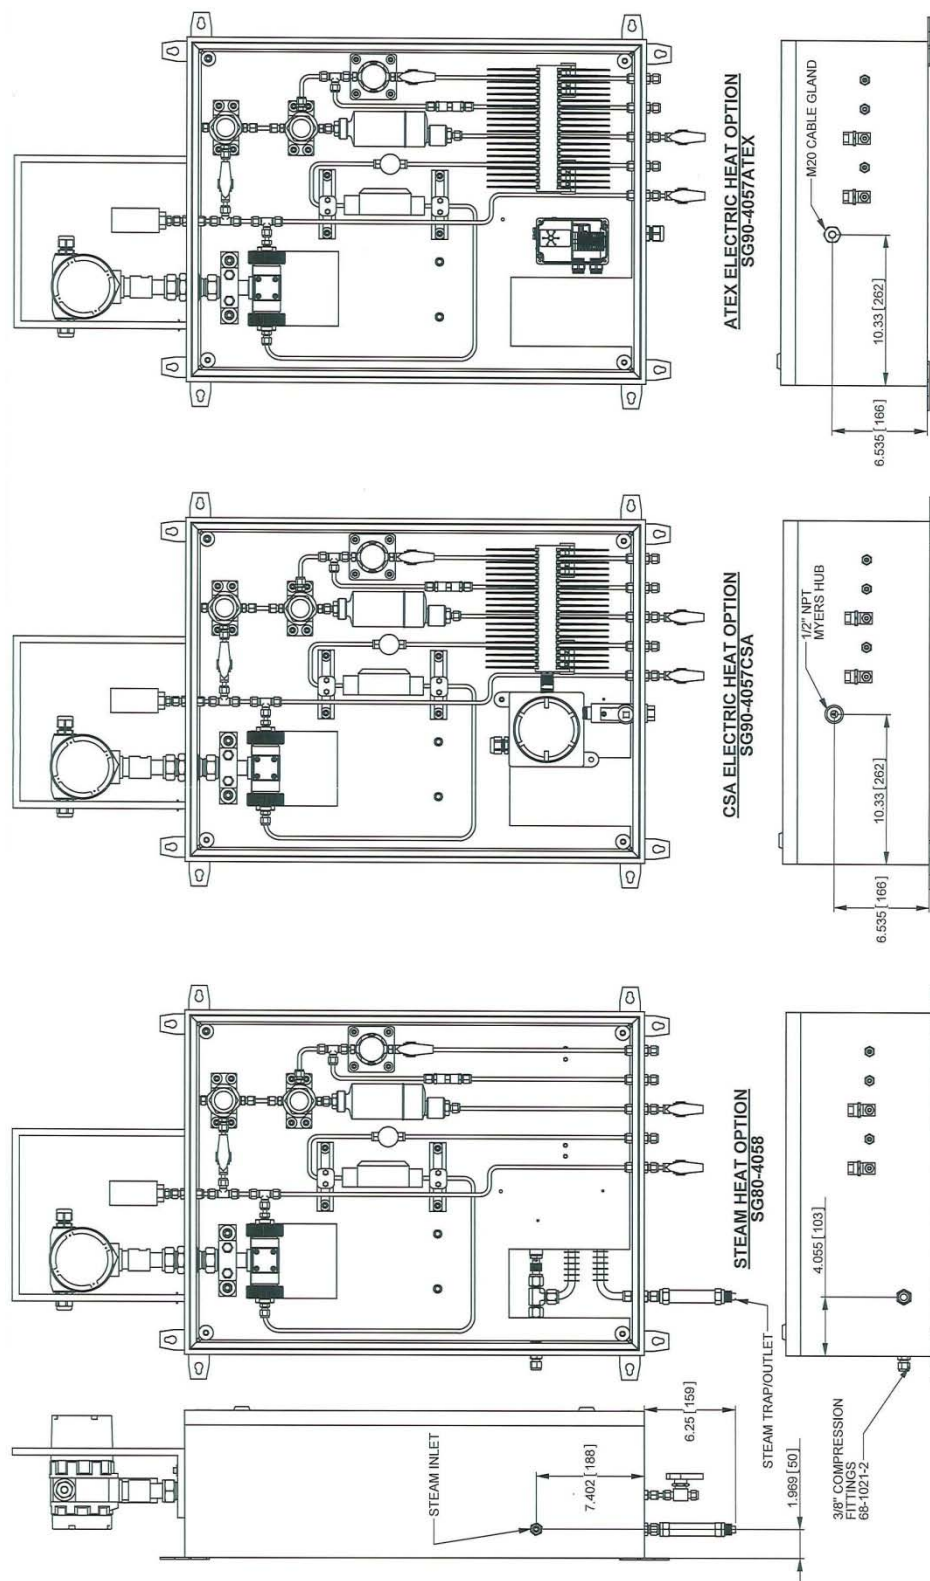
SG91-6003: General assembly drawing, HT wet gas system (sheet 1 of 3)
